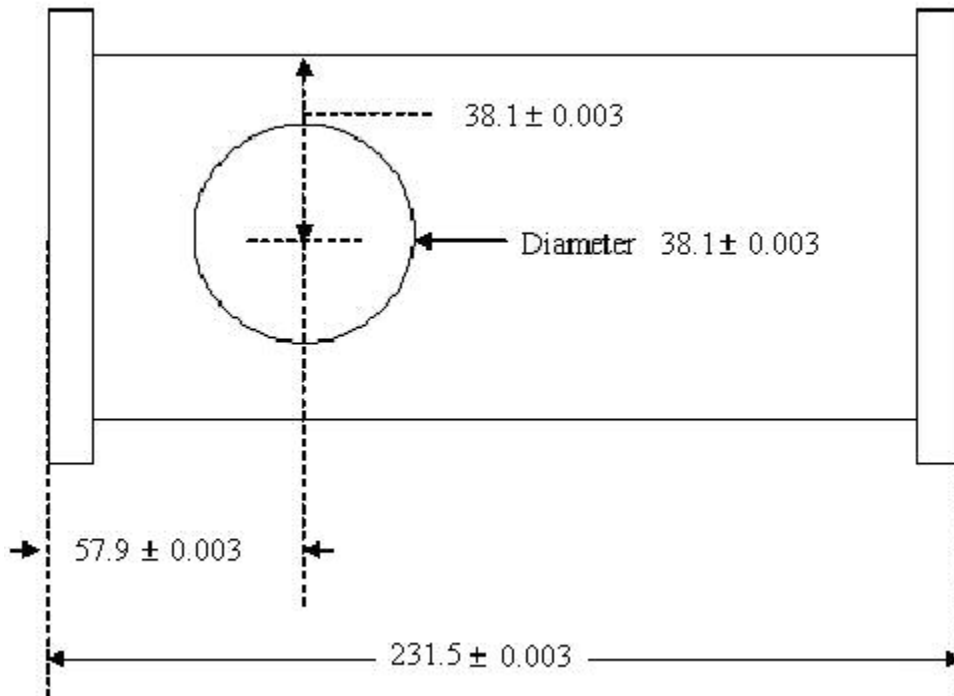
Mechanical drawing of the microwave chamber. Dimensions are mm.
